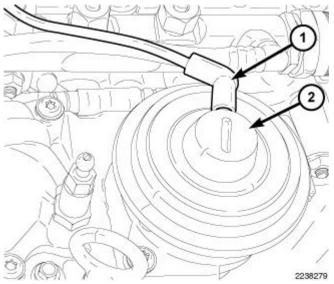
Vacuum Line & EGR Valve Courtesy of CHRYSLER LLC
